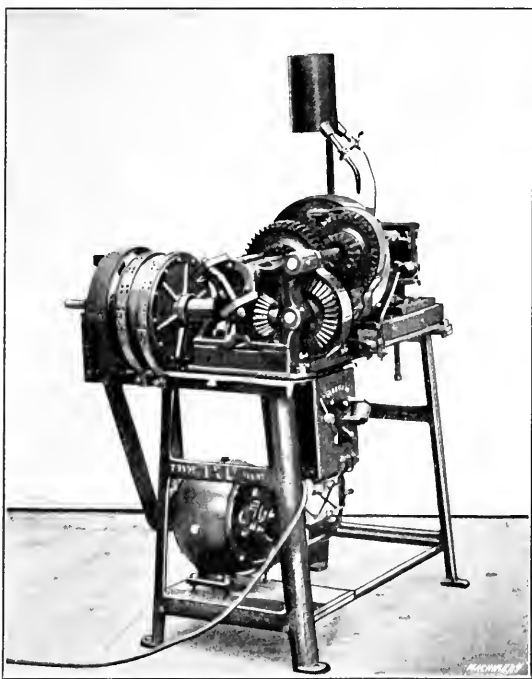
Operating Side of the Rebuilt Pipe Threader
